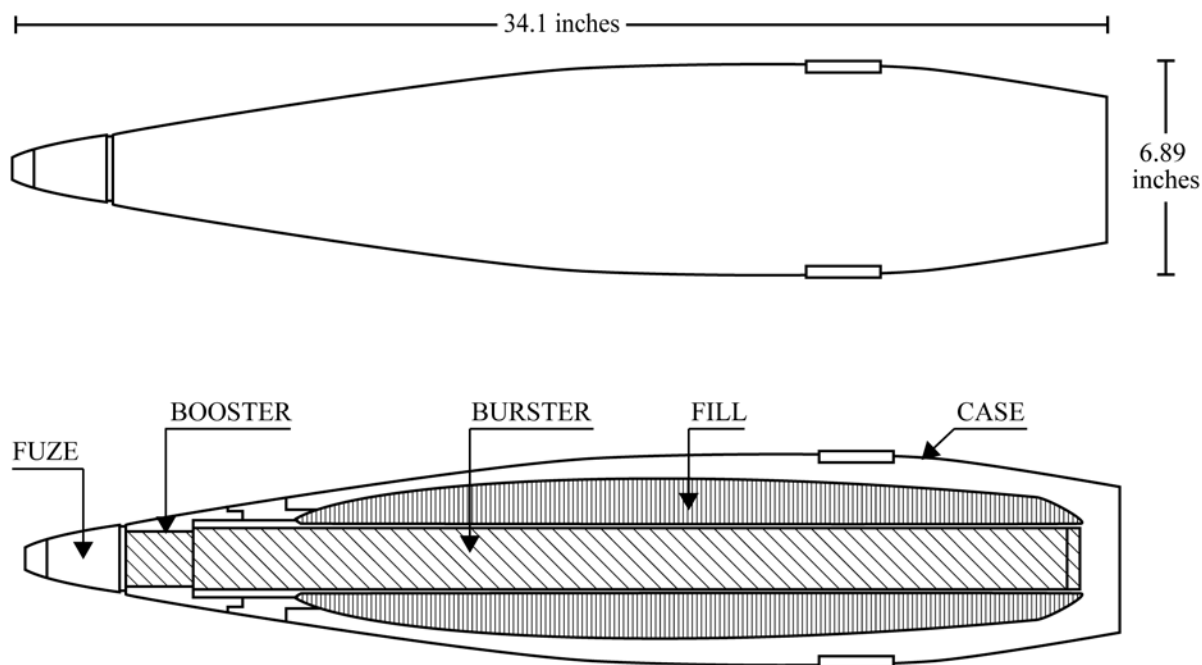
Projectile, 175-mm, Gun, T223 - Line Drawing
